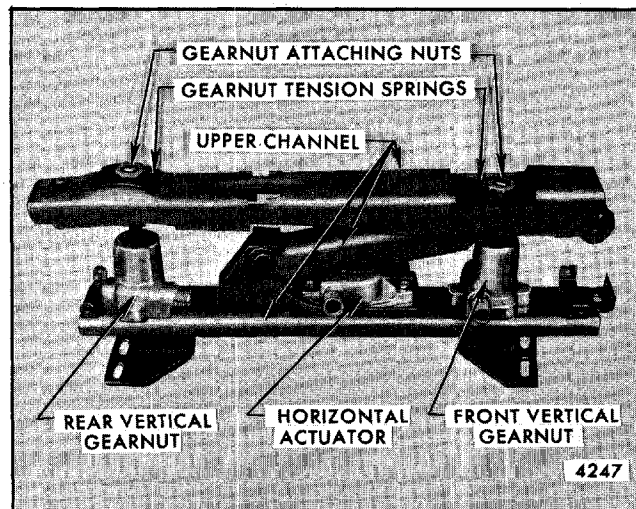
Six-Way Seat Adjuster - "B, C and E" Styles
